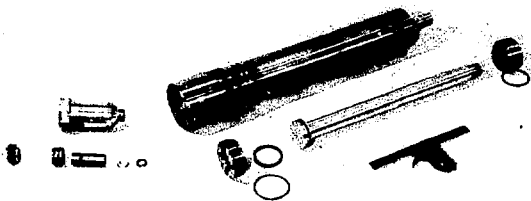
ACTUATOR AND GAS-GENERATOR ASSEMBLIES, WITH ONE SET OF INTERNAL COMPONENTS. NOTE VENT-HOLE IN TOP OF PISTON.
